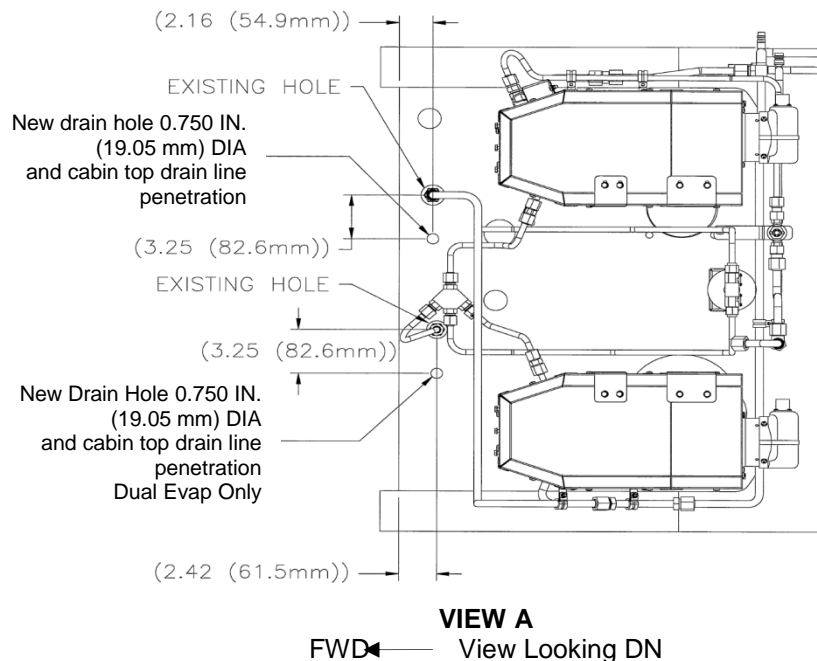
429EC-6242-1 Water Screen Assembly Installed
